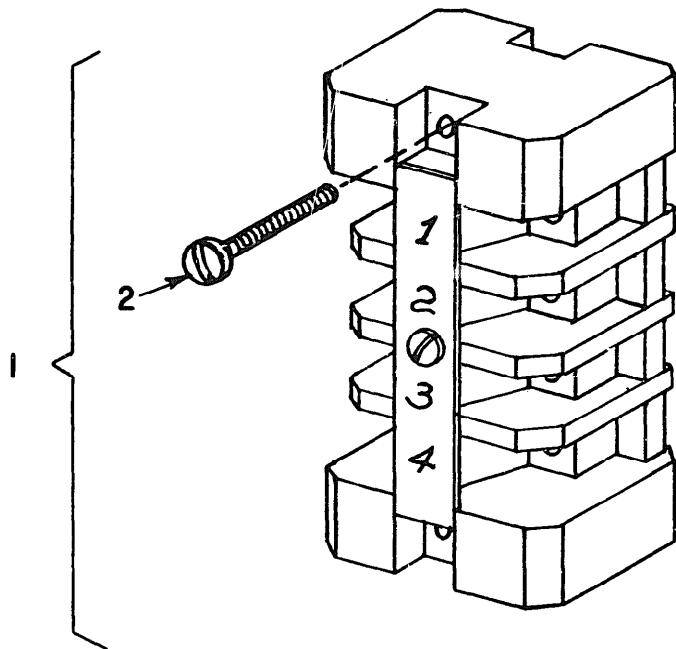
Holder, Fuse - 30A, 600V, 2-Pole
